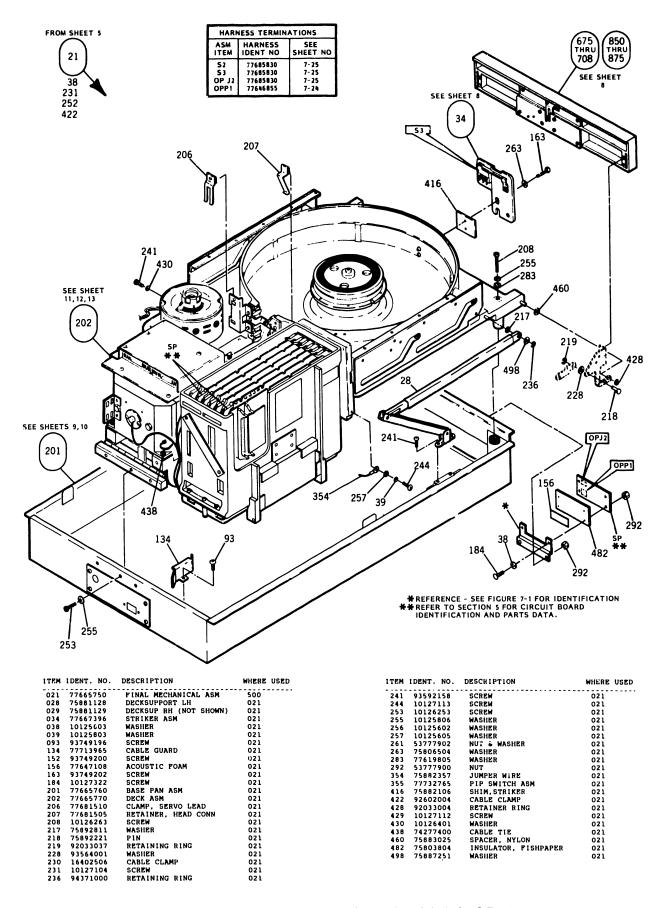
FINAL MECHANICAL ASM (1 OF 3)
